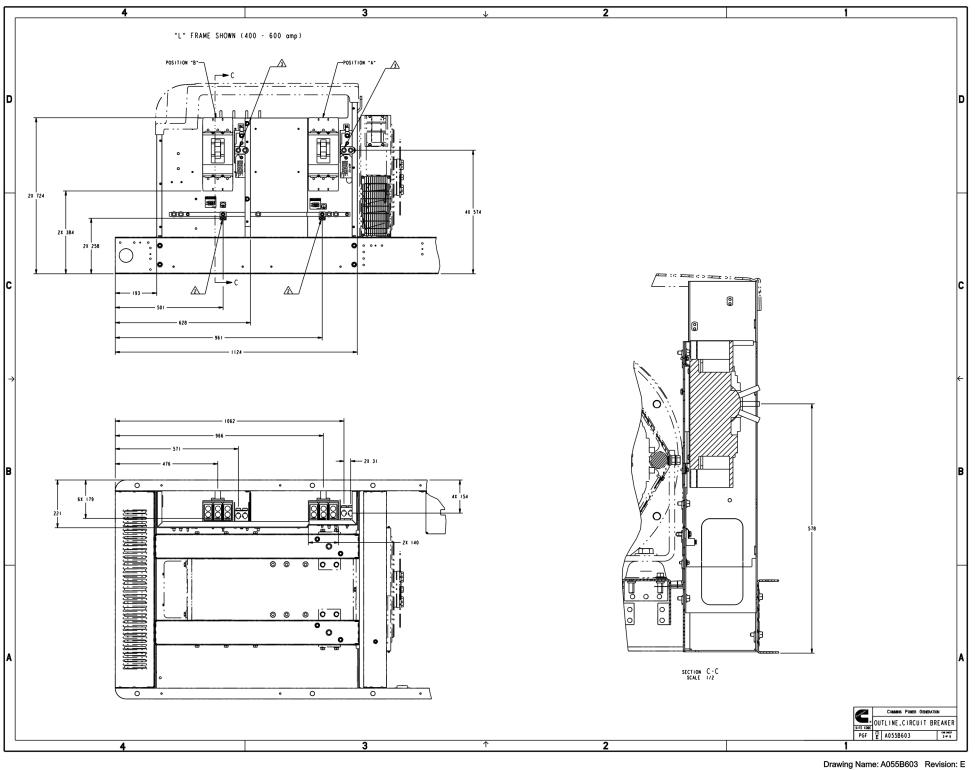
CIRCUIT BREAKER OUTLINE DRAWING (SHEET 3 OF 6)
